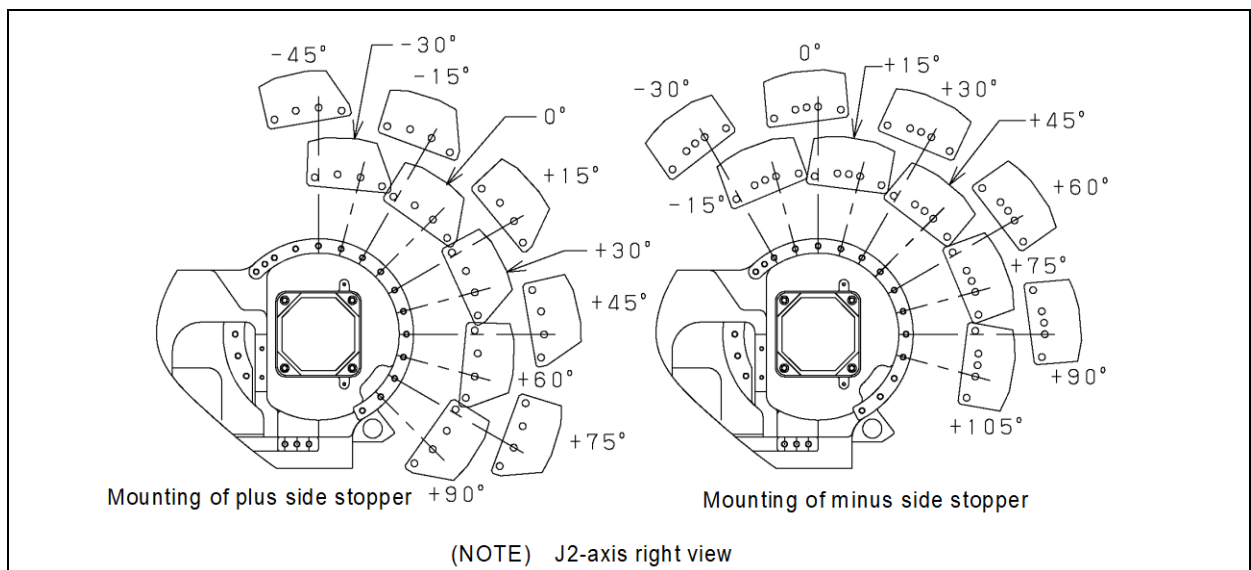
(i) Mounting the J2-axis mechanical stopper (R-2000iB/165CF)
